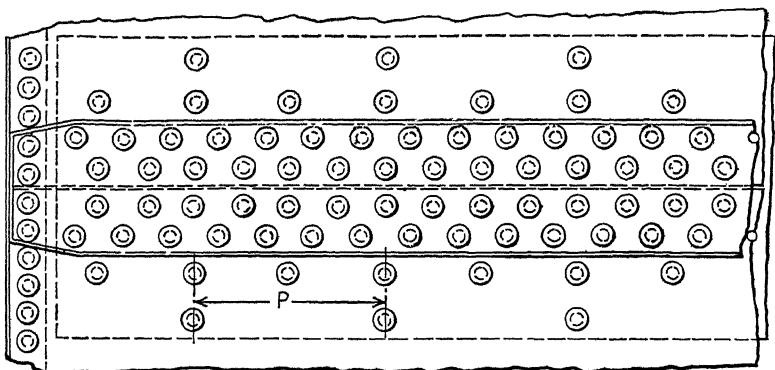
Quadruple-riveted butt and double strap joint. (A.S.M.E. Boiler Code)
